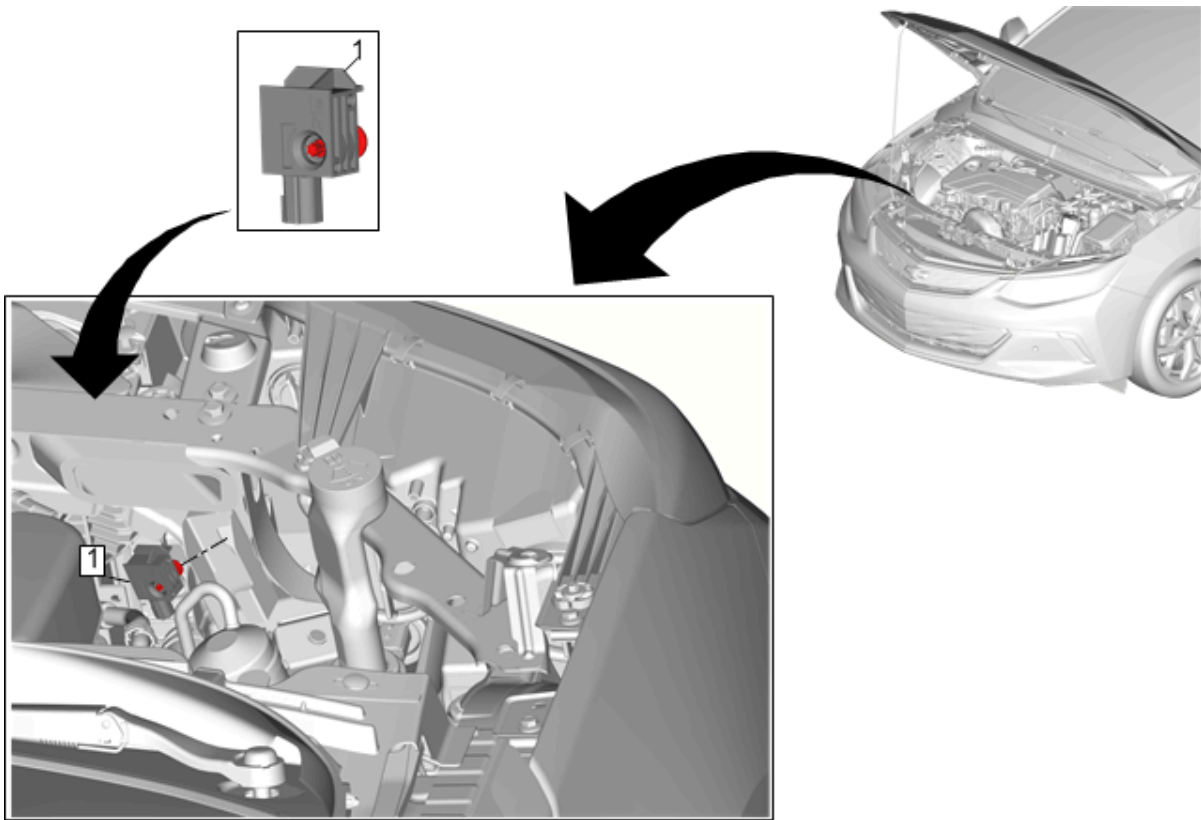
Airbag Front End Discriminating Sensor - Right Side
